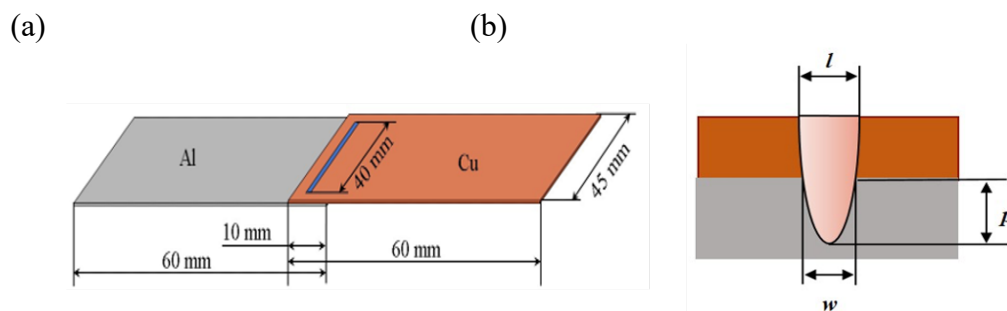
Sample dimensions(a), weld bead characteristics(b).
